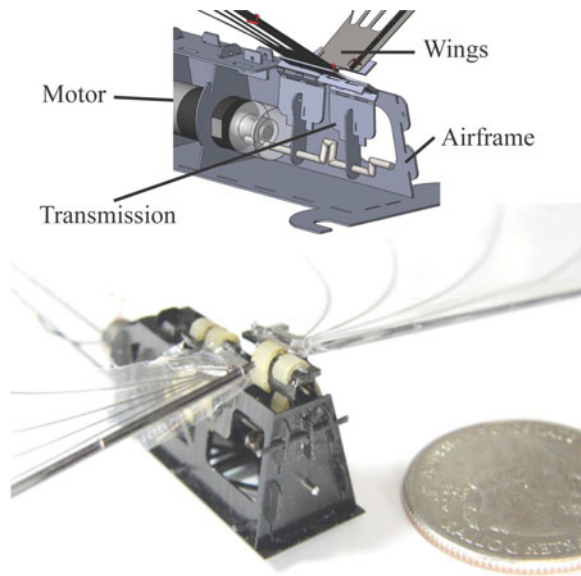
FWMAV and a CAD model showing a cutaway of the inside main drivetrain.
